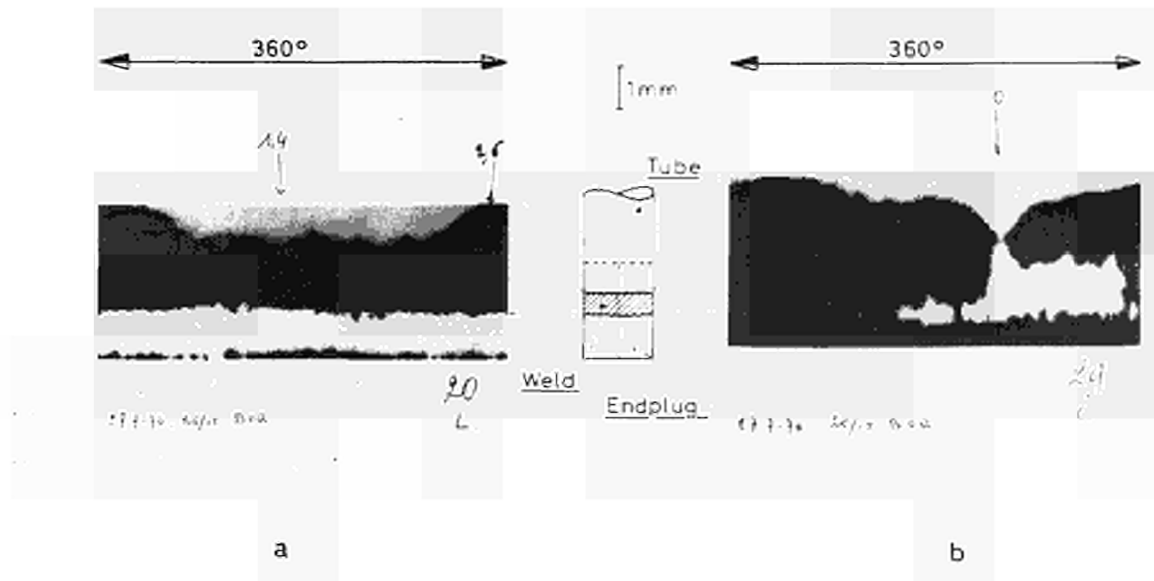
Obtained document for a welded (a) and an unwelded (b) end plug.
